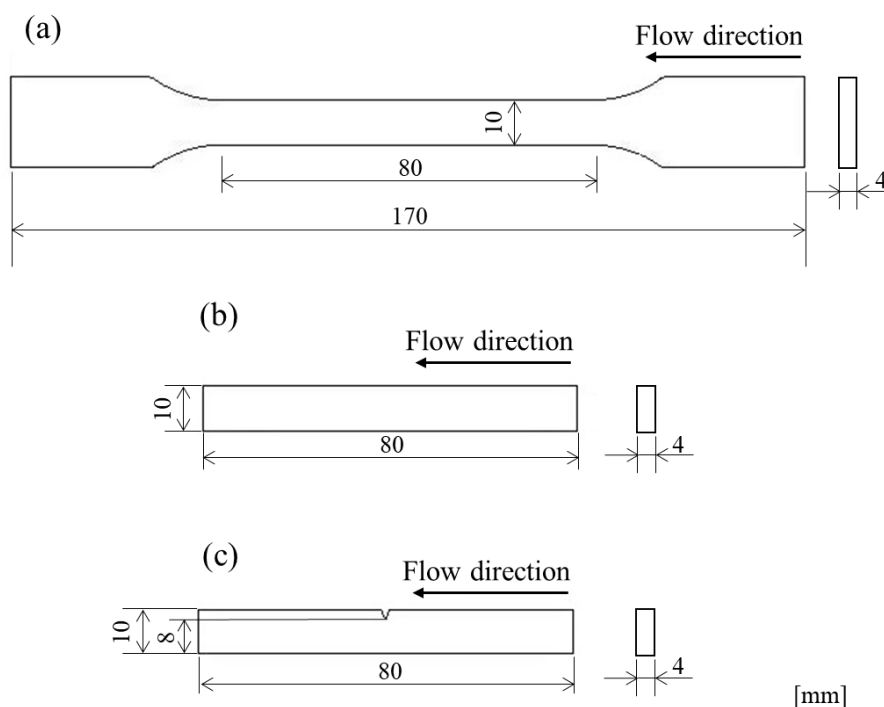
Geometries of (a) tensile, (b) flexural and (c) Charpy impact specimens.
